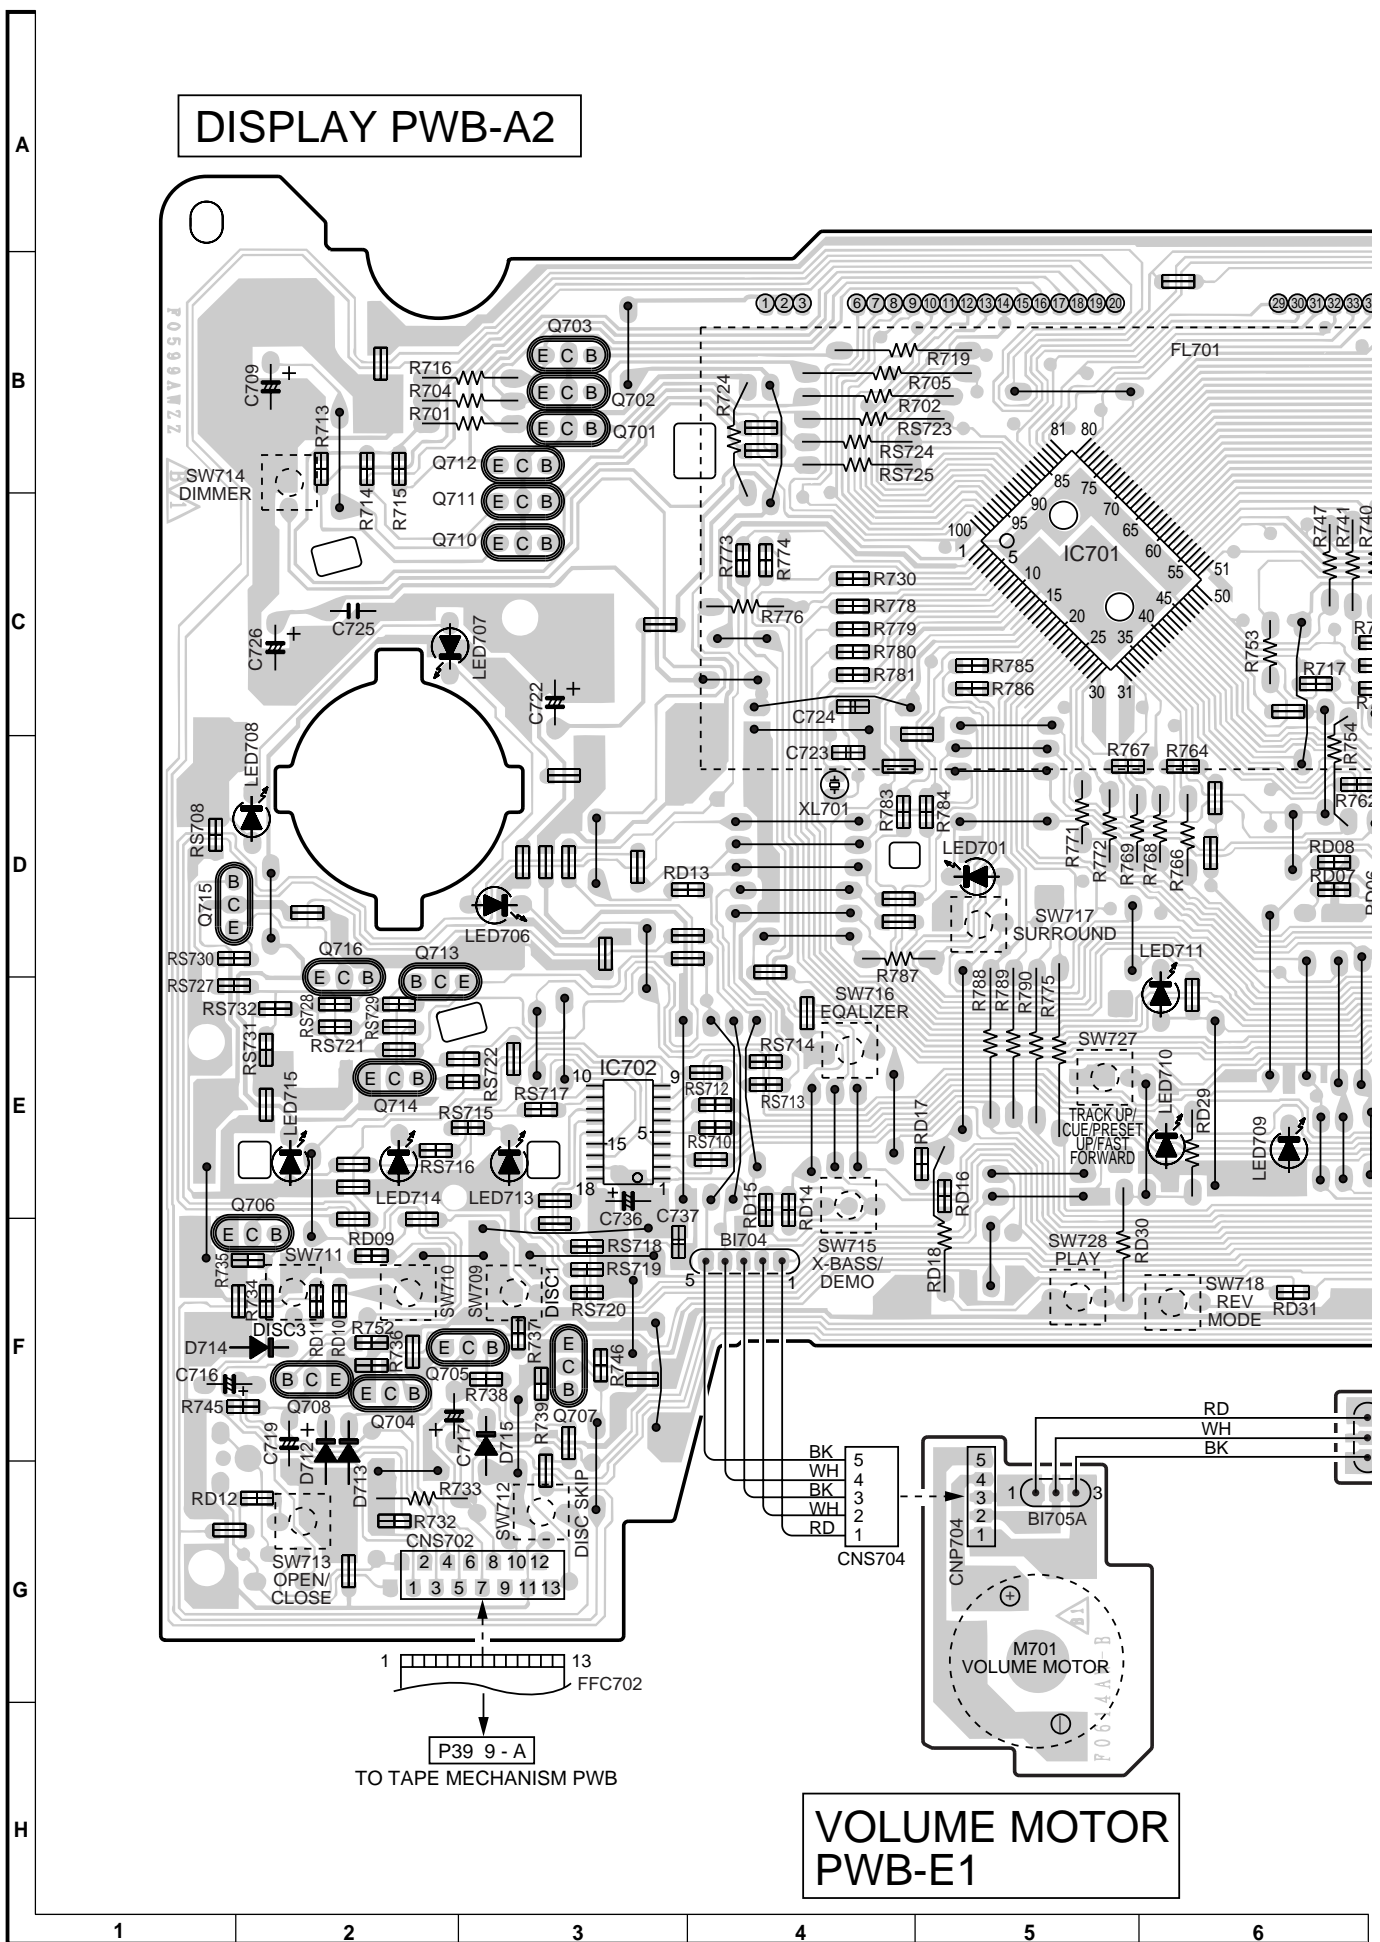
WIRING SIDE OF P.W.BOARD (3/8)
